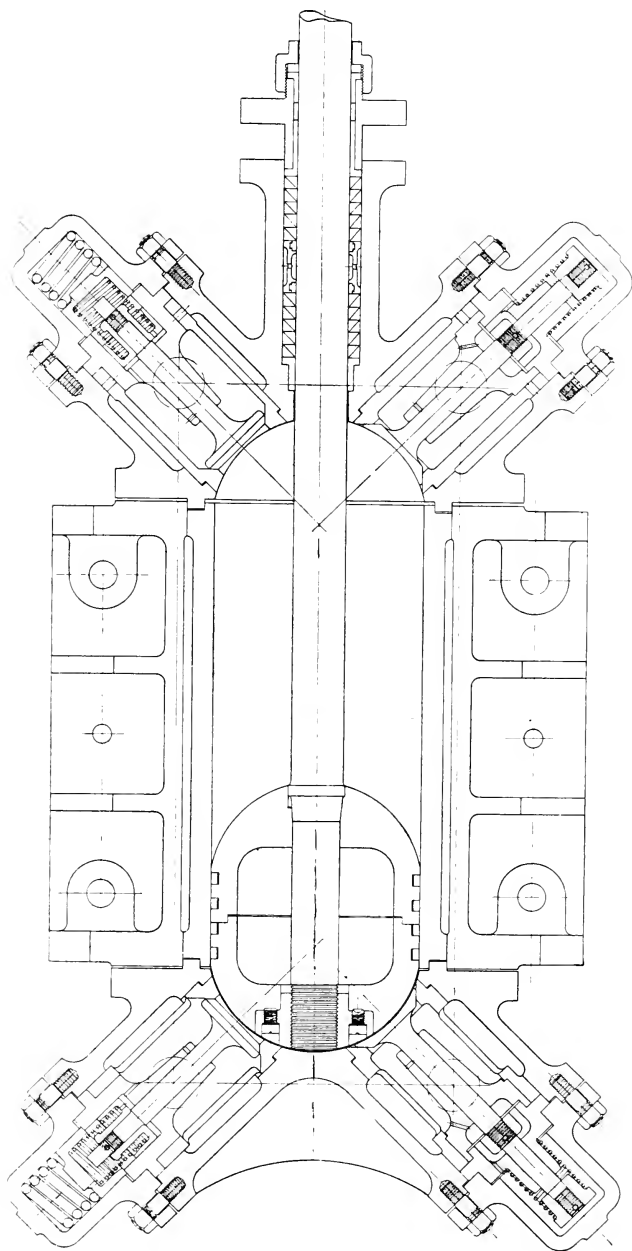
shows a typical horizontal slow running ammonia machine driven by belt, while Figure 8 gives a section through a compressor cylinder.
